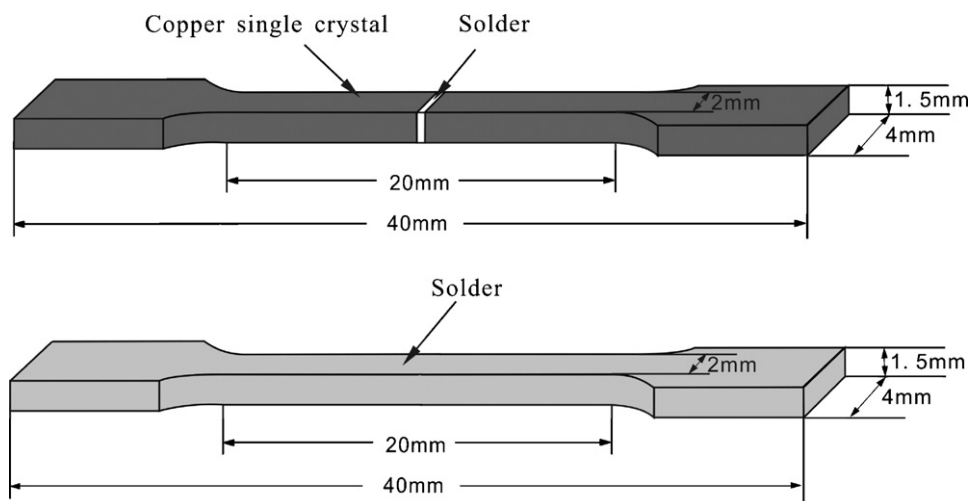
Illustration of tensile samples of solder joints and bulk solder alloy.
